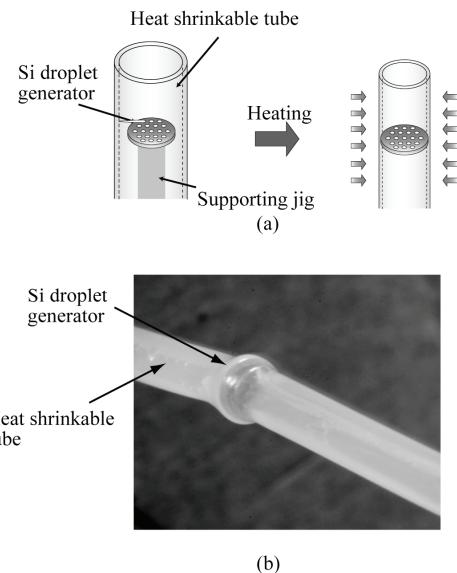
Mounting of in-tube droplet generator in heat-shrinkable tubing: (a) before and (b) after heating.
